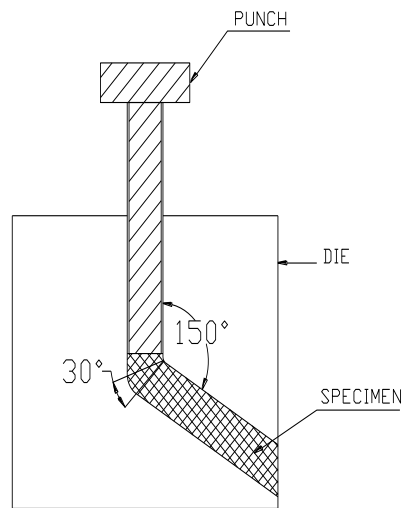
The schematic sketch of ECAP die assembly for extruding rod and tube
